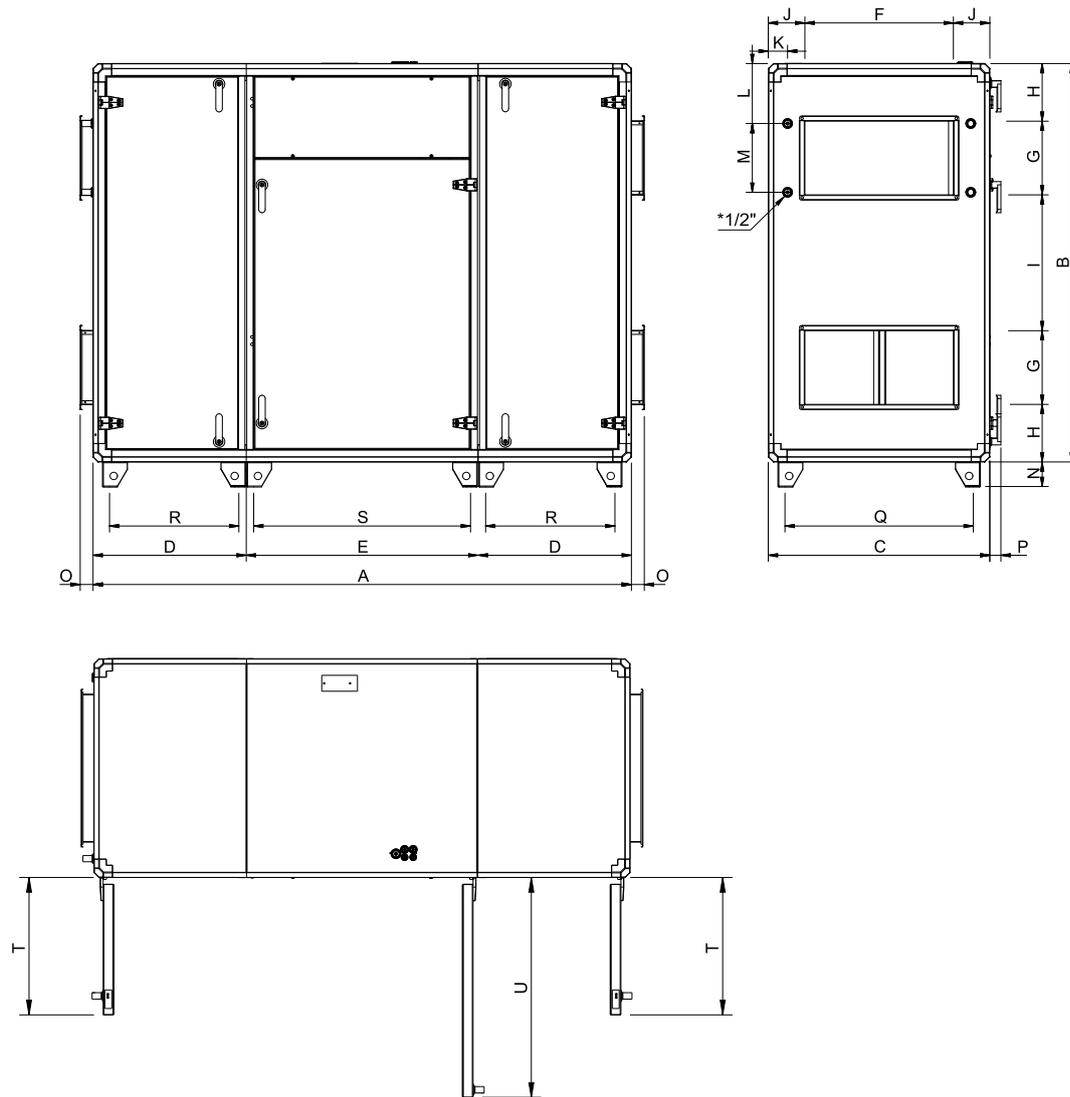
Dimensions (mm) SC06 (Drawn as left hand unit)
